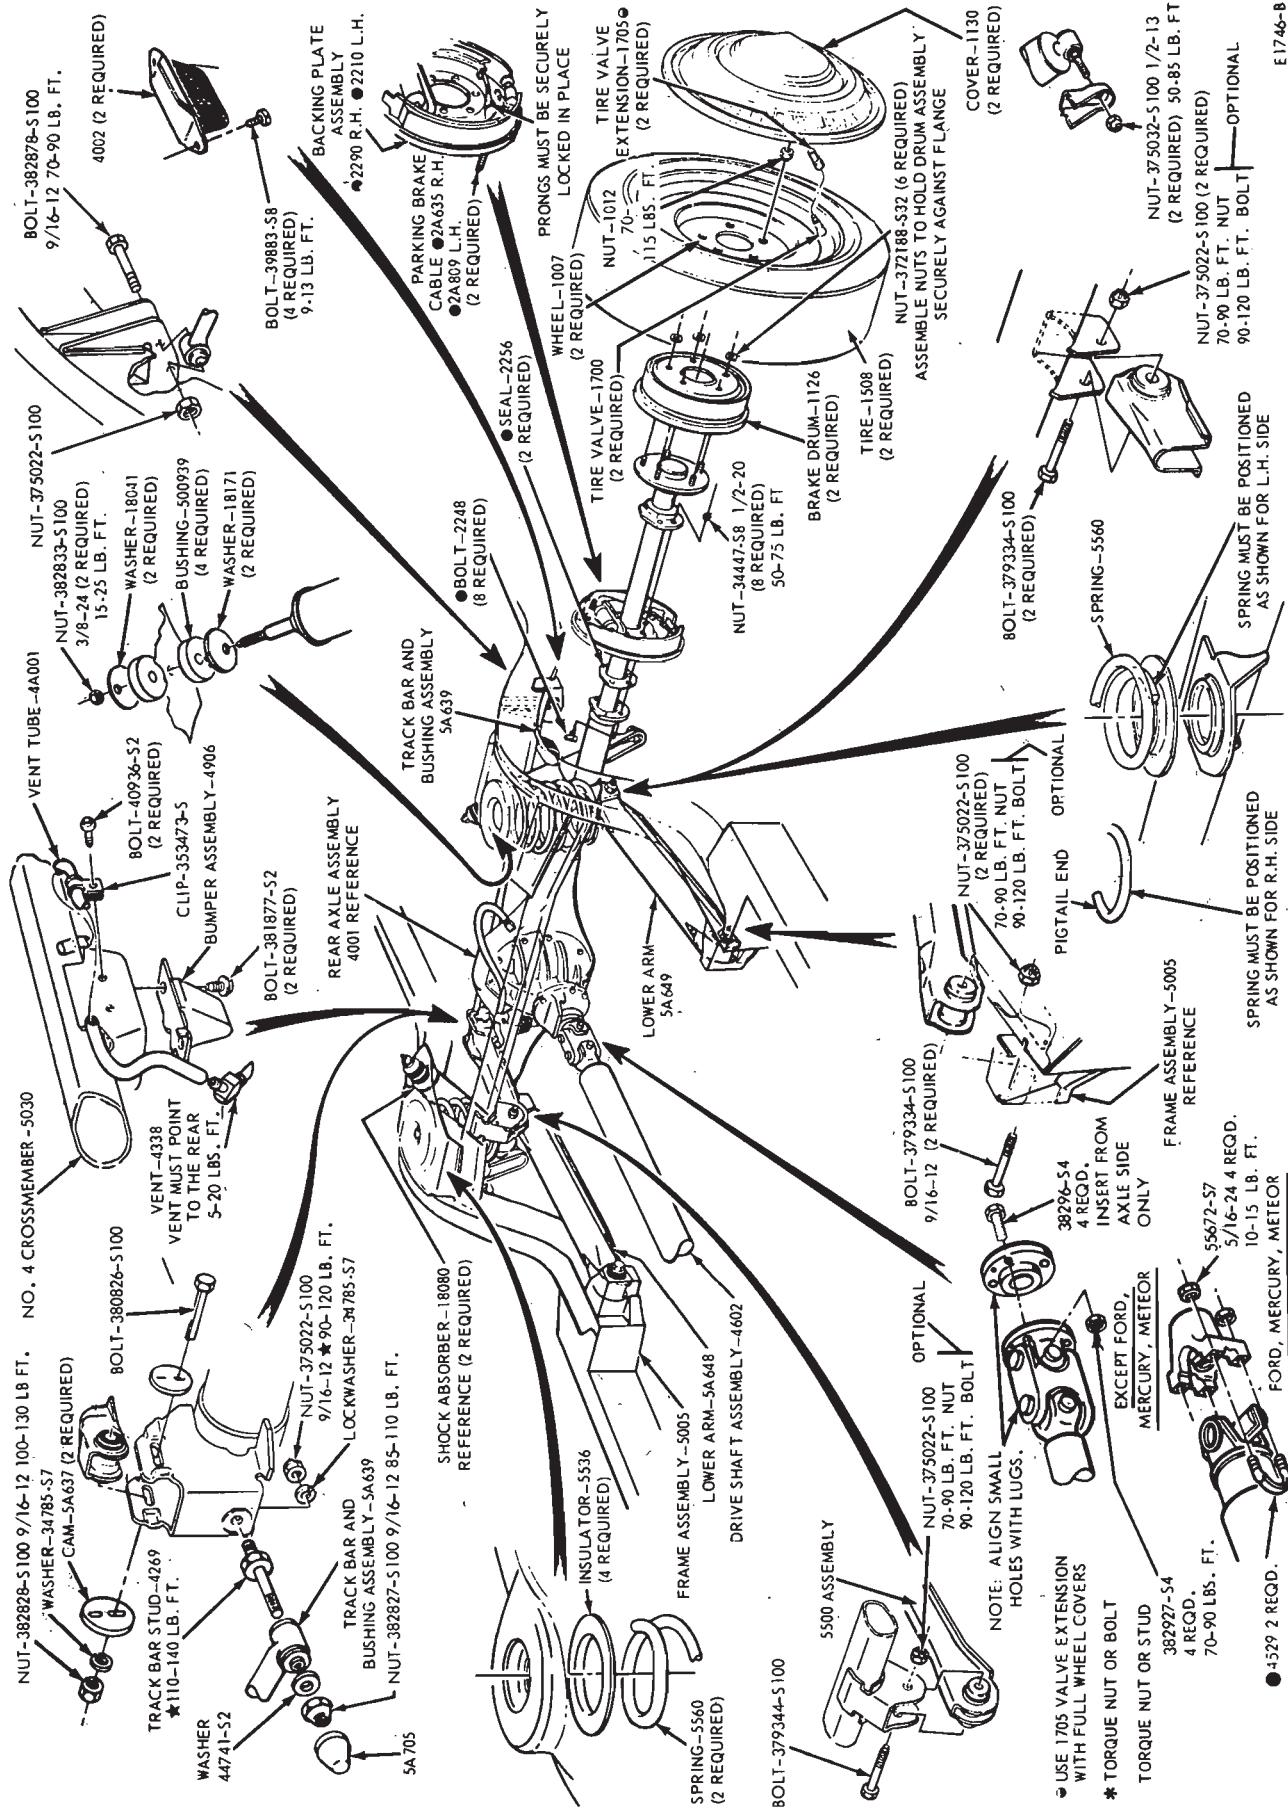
Rear Axle Installation—Coil Spring Suspension
